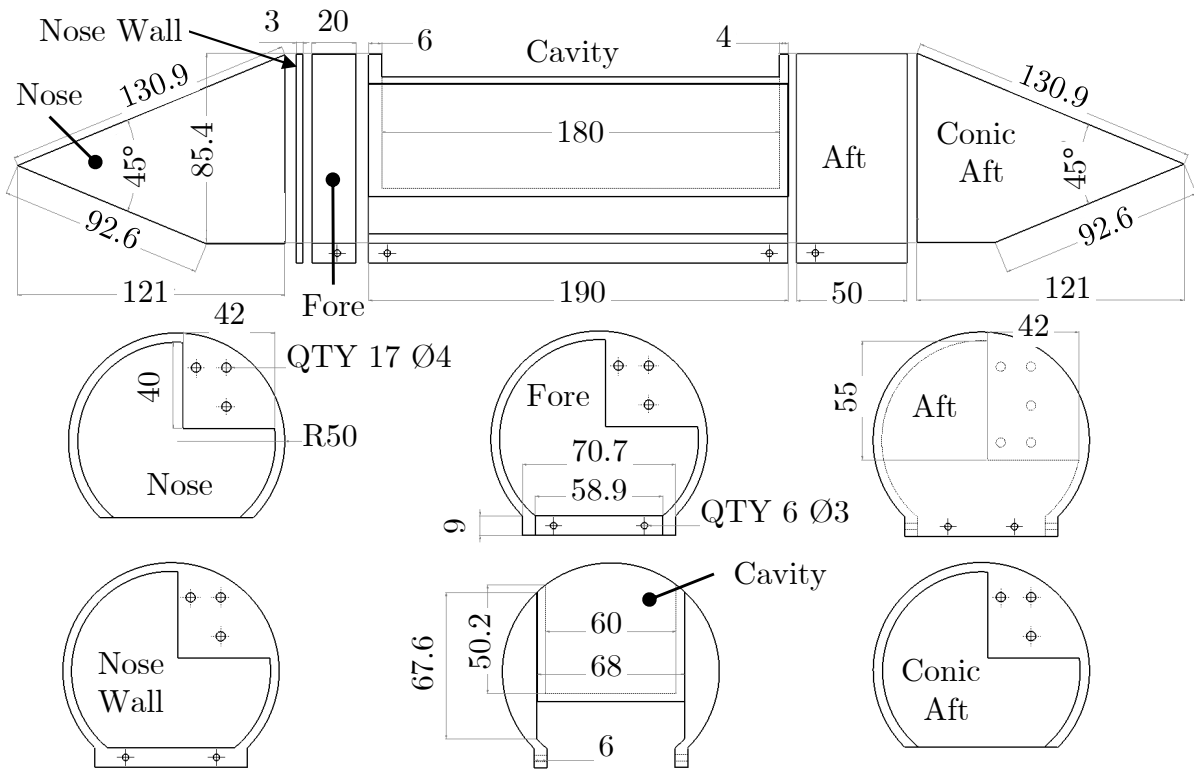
Flat Cavity Model Schematic: Top, Bottom, Front, Back View: dimensions in mm
